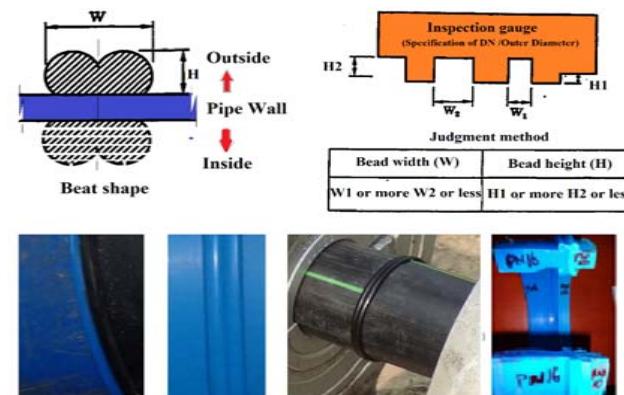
BF Bead Inspection by Gauge and Normal Fusion Bead
